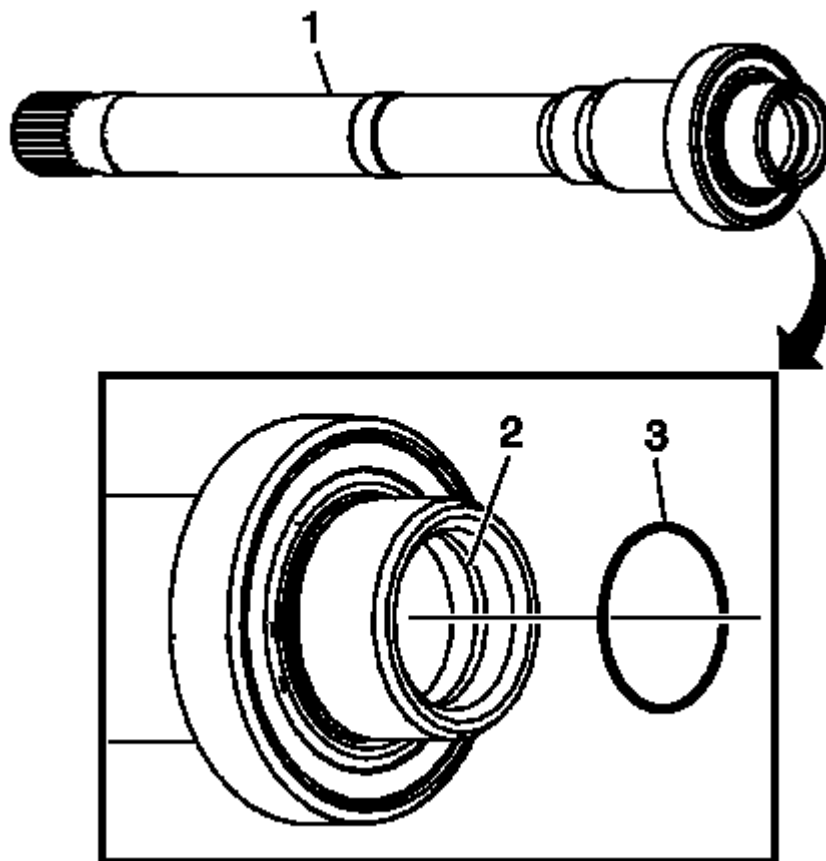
Intermediate Shaft O-Ring (Second Design)
